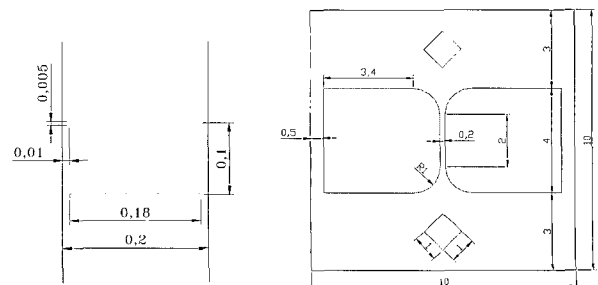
Dimensions of micro tensile specimen and aluminum gauge mark.
